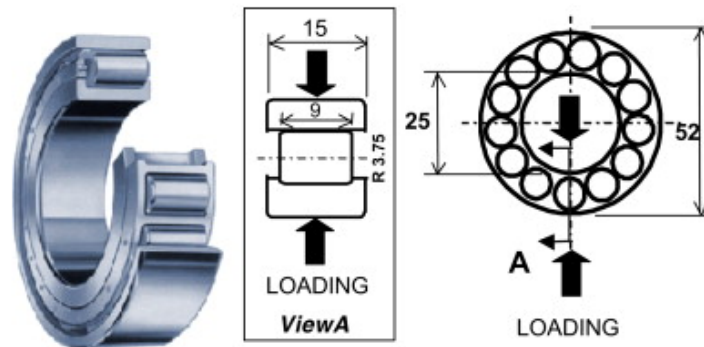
Geometry of NU205 rolling bearing used in the tests
